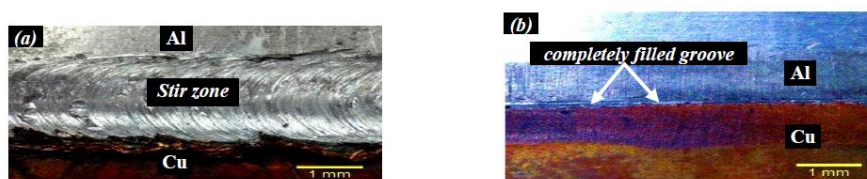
Optical macrograph of dissimilar aluminium and copper joint, FSW at a rotational speed of 1750; (a) Top view and (b) Bottom view.
